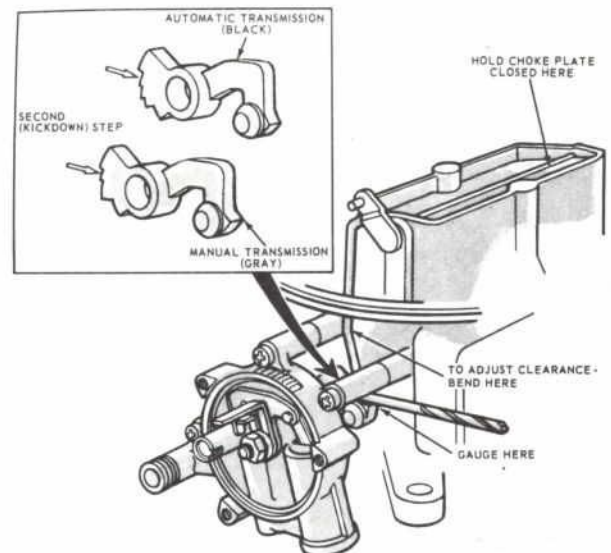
Cobra Jet Fast Idle Cam Adjustment
